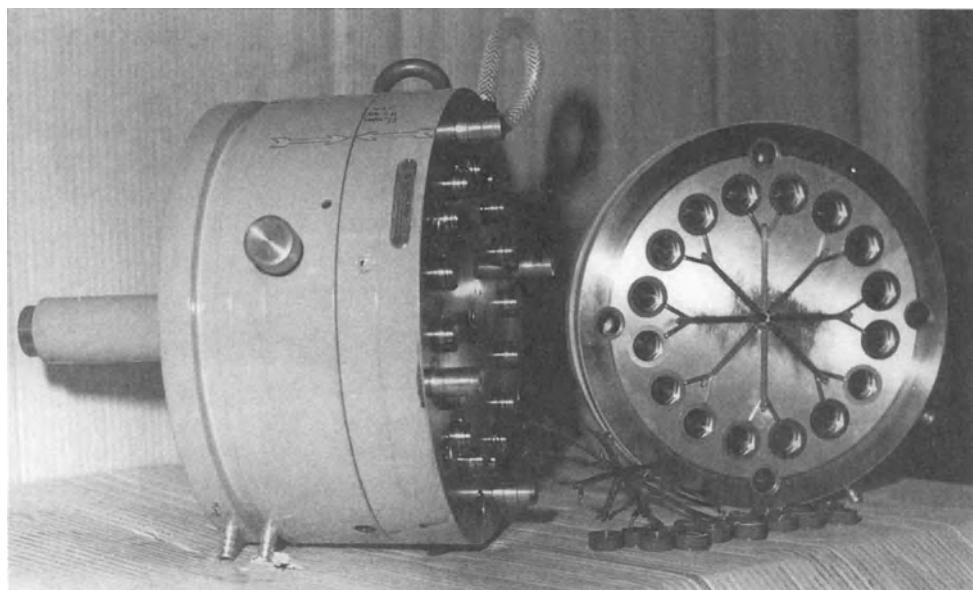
Unscrewing mold for fabricating threaded caps.
